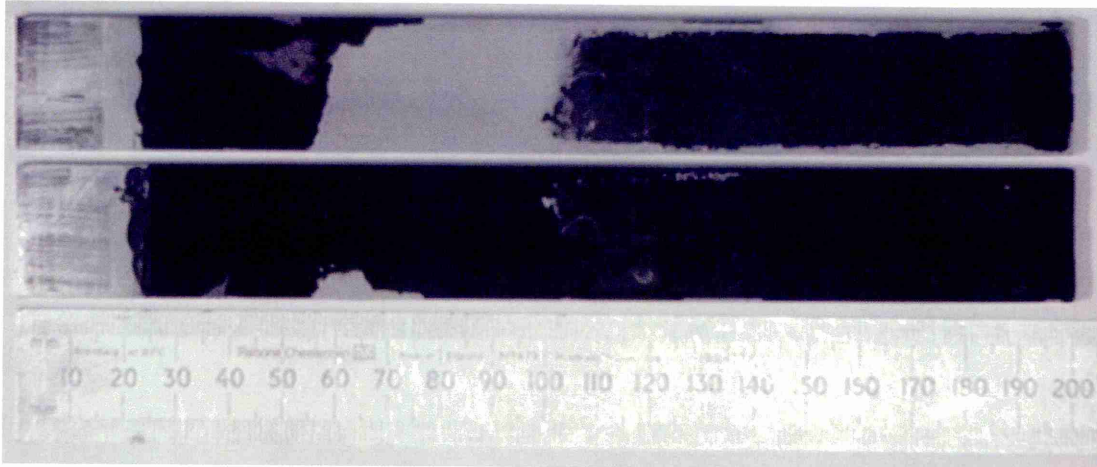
Alumina grit blast + AZS fractured wedge test specimen
